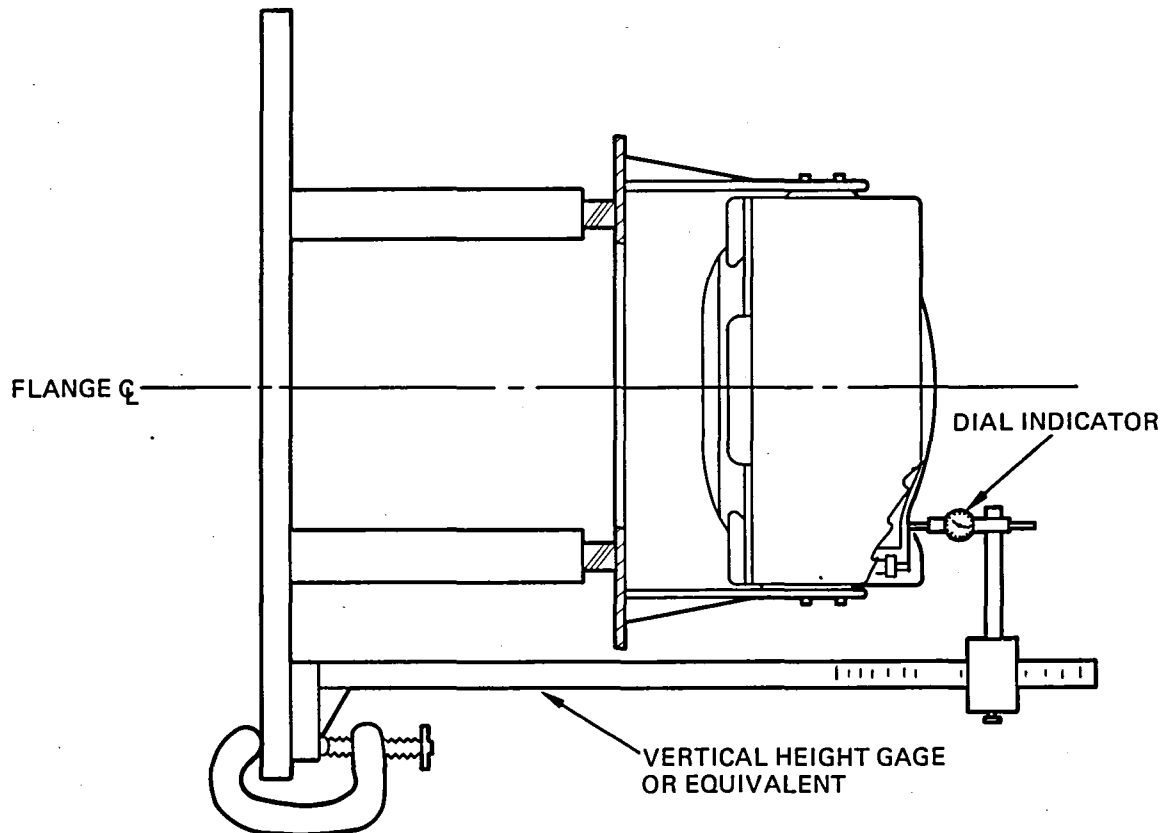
Illustration of procedure used for aligning thruster with the the vacuum chamber axis.
